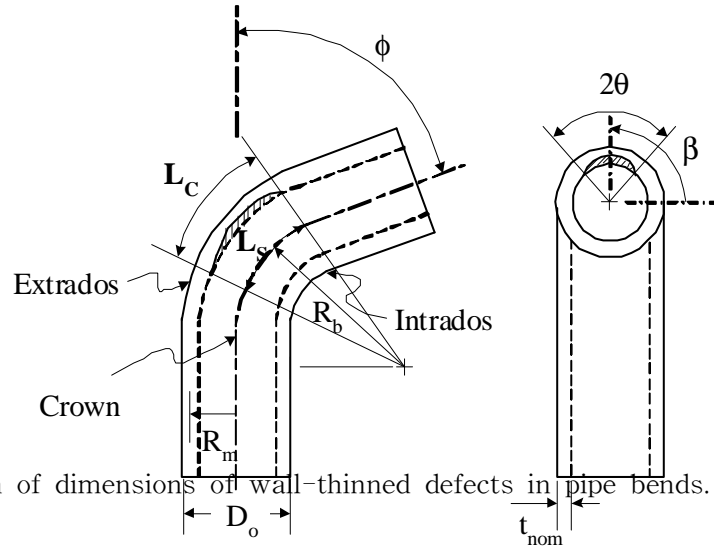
Definition of dimensions of wall-thinned defects in pipe bends.
